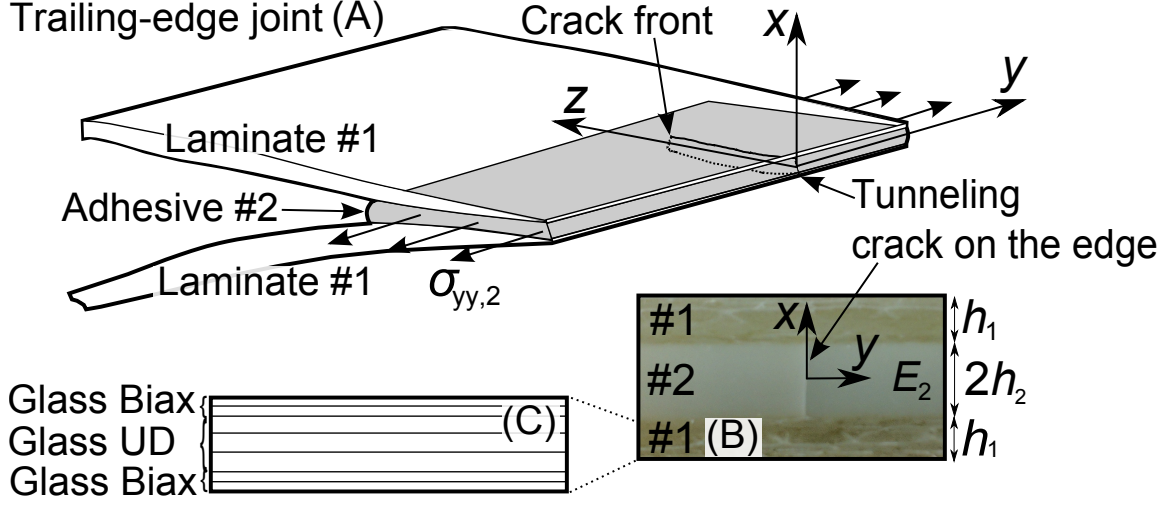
(A) Trailing-edge joint with a tunneling crack propagating across the adhesive layer in the  $z$ -direction. (B) Photo of a tunneling crack in a trailing-edge wind turbine blade joint. (C) Typical layers in a glass fiber laminate used in a wind turbine blade joint.
